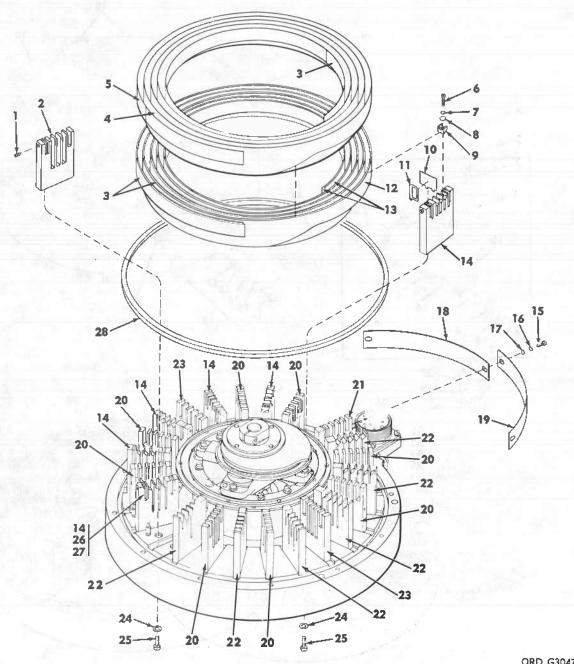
TRANSMITTER, COURSE DATA SUBASSEMBLY /9006523/-PARTIAL EXPLODED VIEW /SEE FIGURES 31 AND 52 FOR NEXT HIGHER ASSEMBLY/
